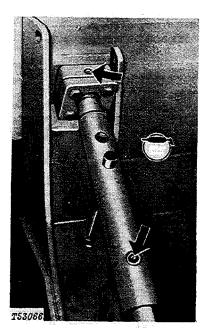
Pitch Adjusting Jack and Socket (Dozer Blade) (2 Points)
